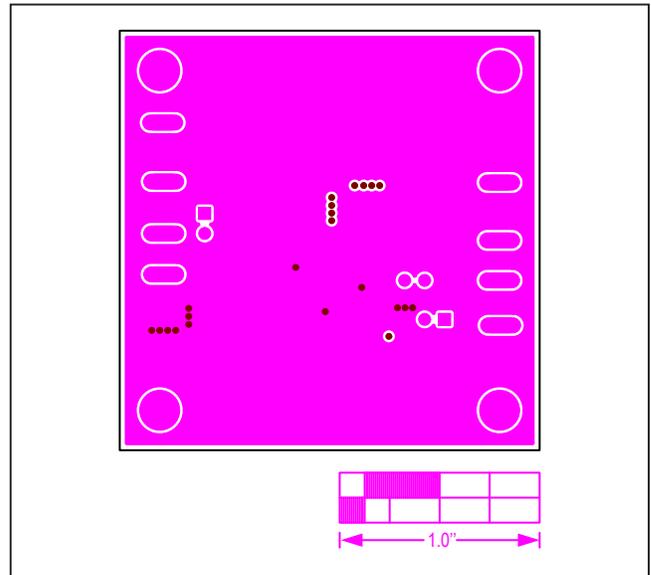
MAX17545 5V Output EV Kit PCB Layout—Inner Layer 2
